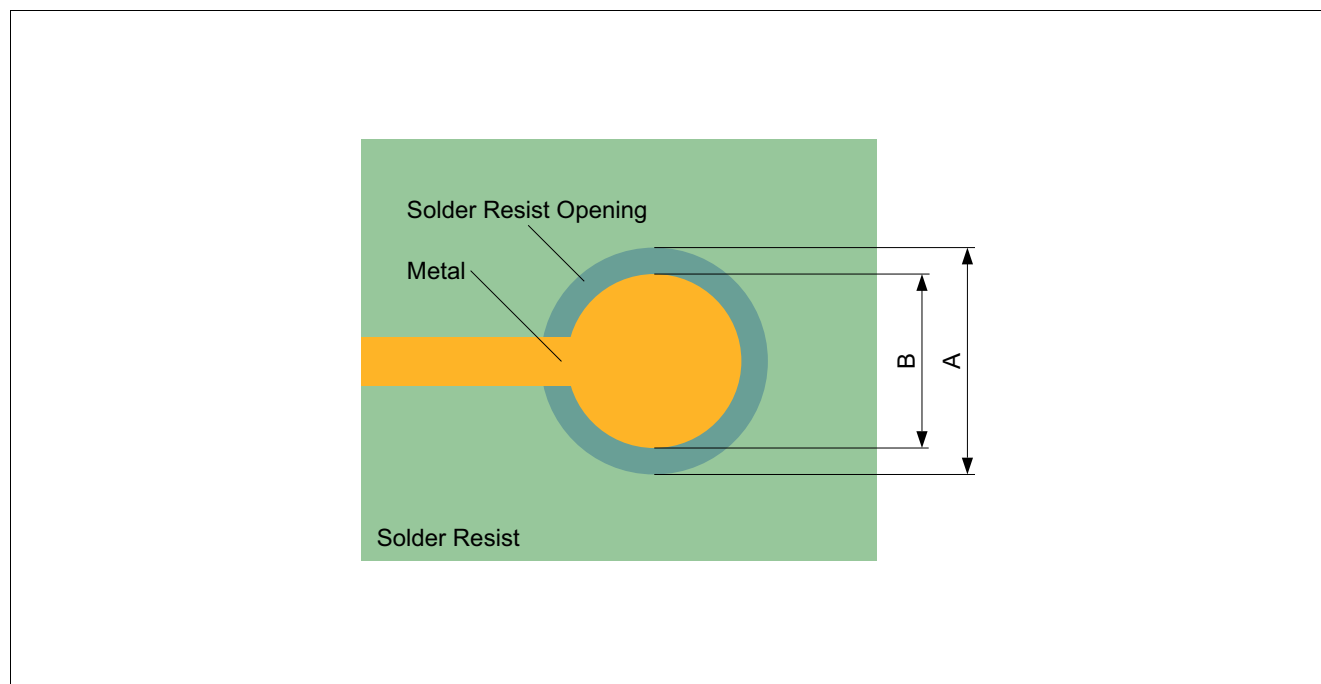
PCB Pad Design Recommendation (NSMD Pad)
